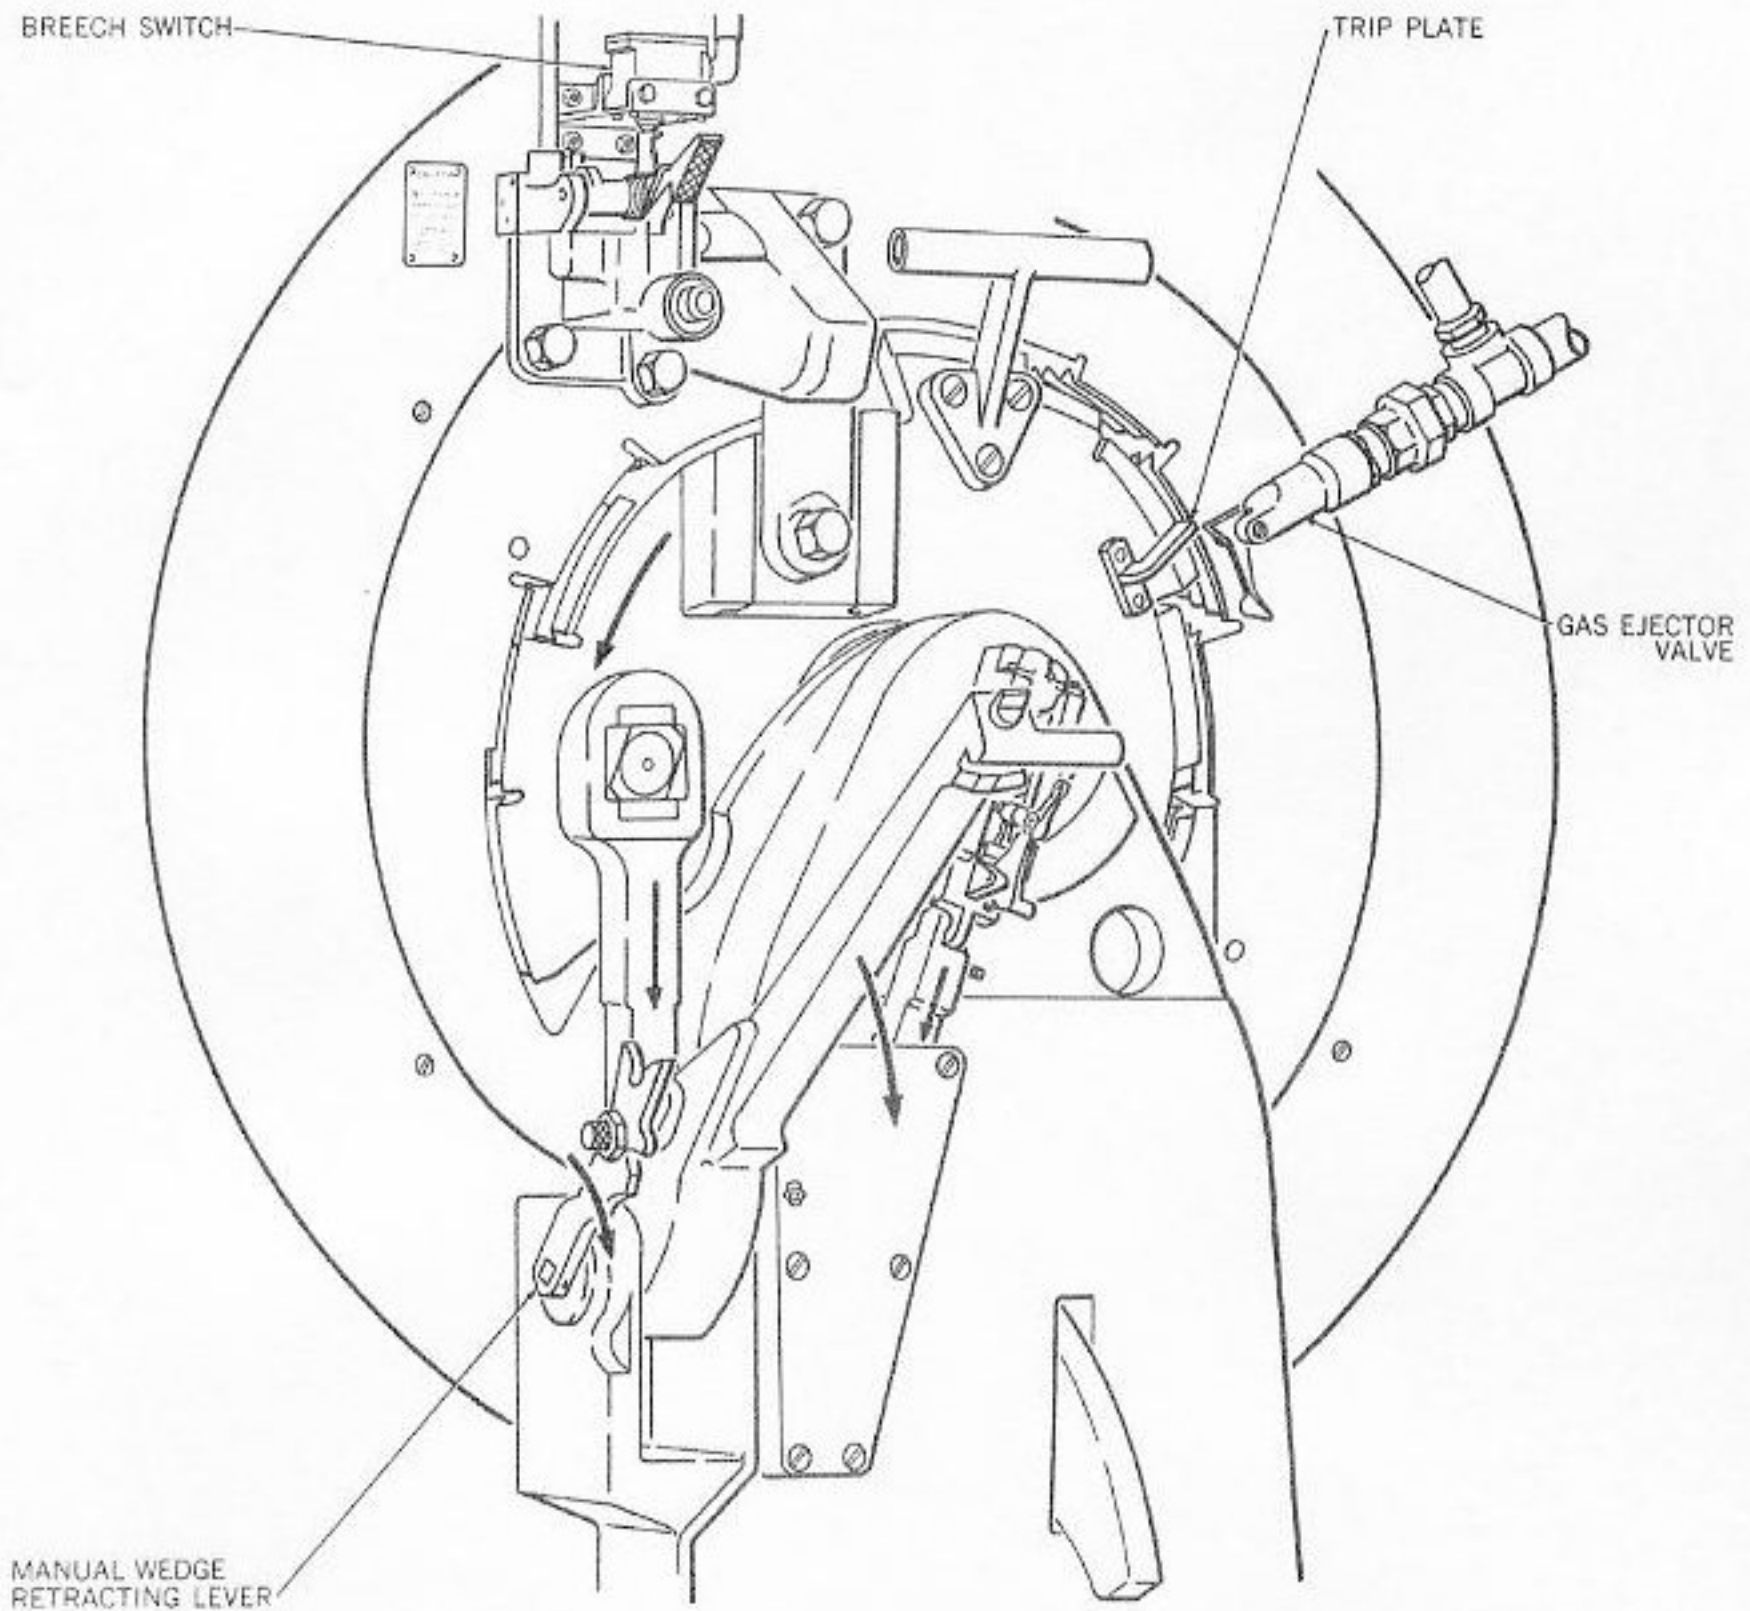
G. 16-inch Gun Assemblies. Breech Opening. Plug Rotation.
